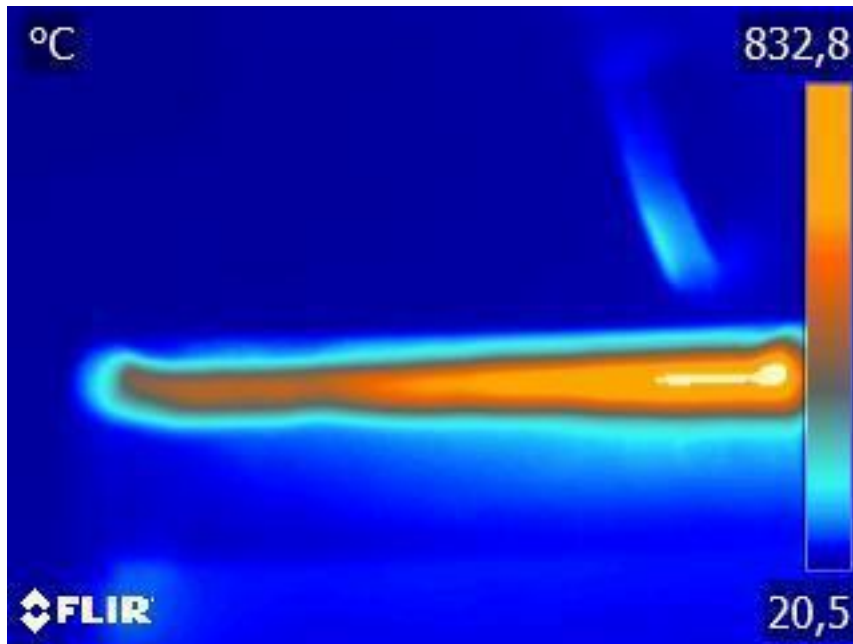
Welding image obtained by FLIR thermal imaging camera
